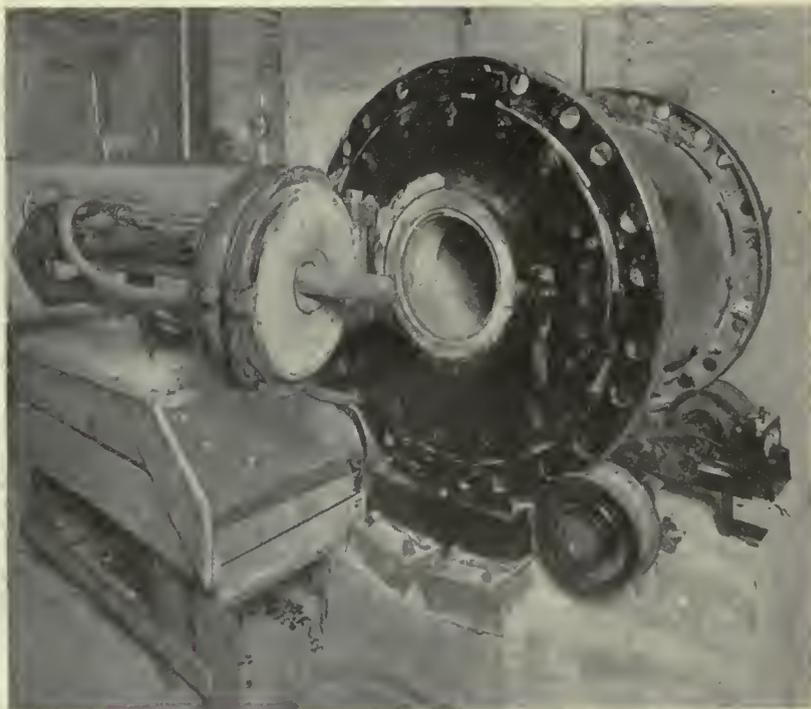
SHOWING METHOD OF CHARGING FURNACE.
